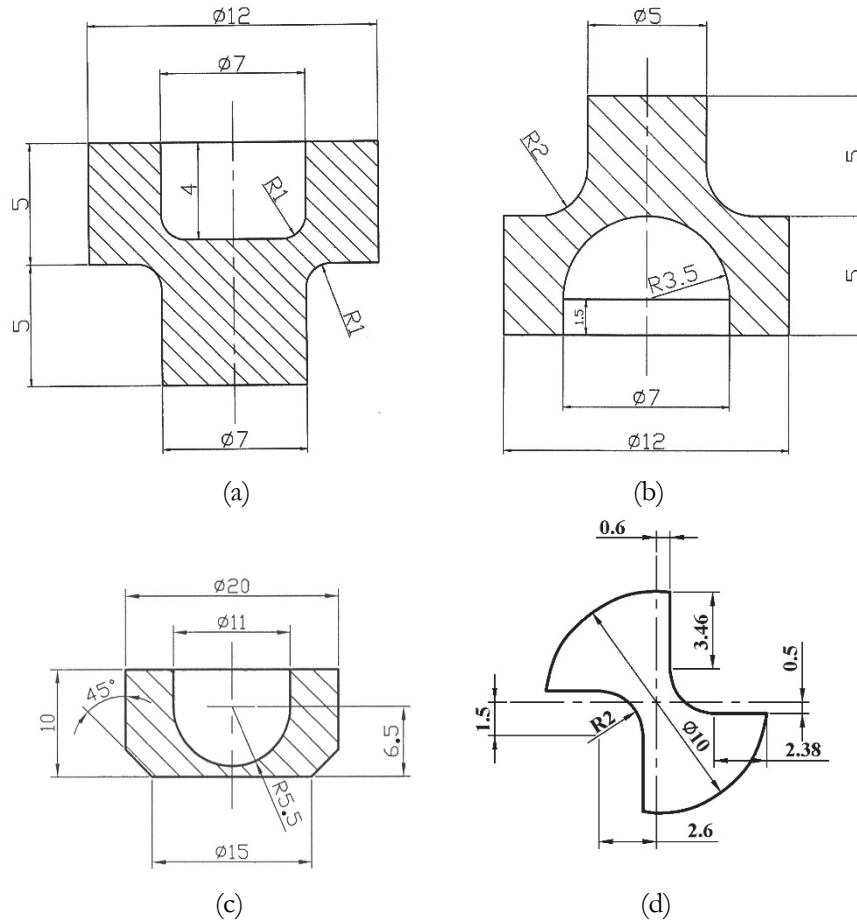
Outlines of the specimens: bell-shaped tensile specimen (a); bell-shaped compressive specimen (b); thick-walled cup-shaped specimen (c); oblique dog-bone-shaped specimen for shear testing under plane strain (d).
